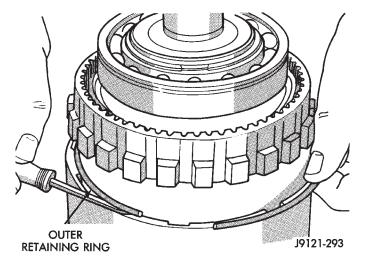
Removing Clutch Drum Outer Retaining Ring
